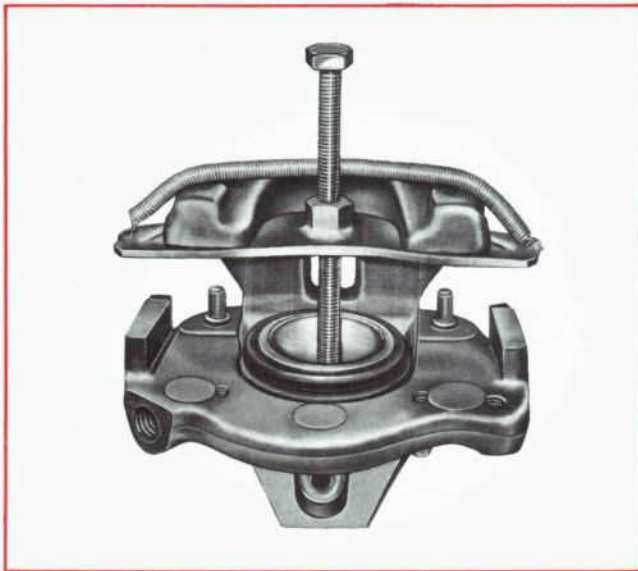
The piston retracting tool positioned properly on the caliper legs.
